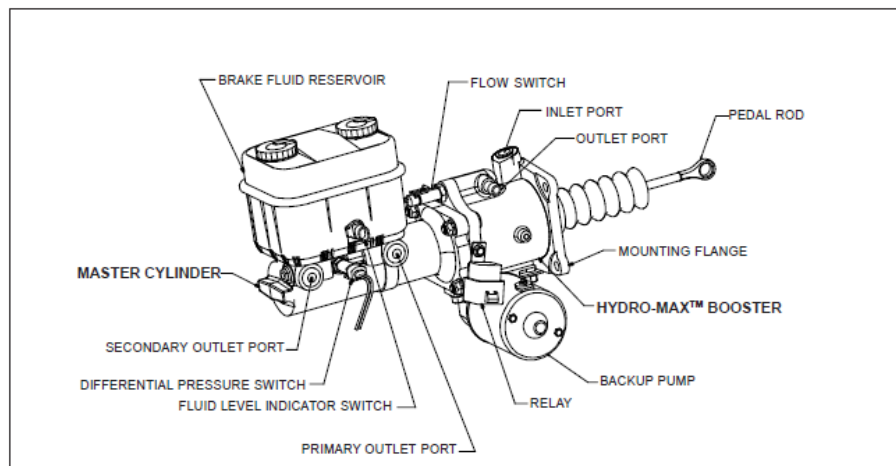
Hydro-Max™ Booster and Master Cylinder Assembly
